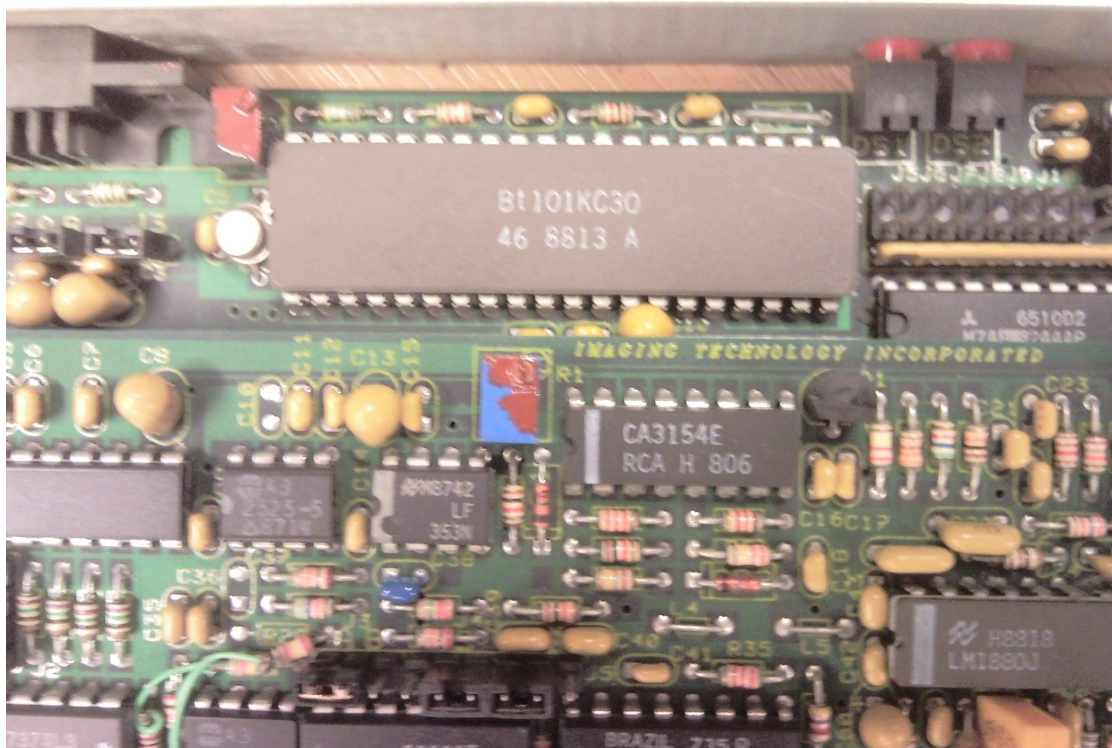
Heurikon HSE-10R board 1 plug-on board closeup
